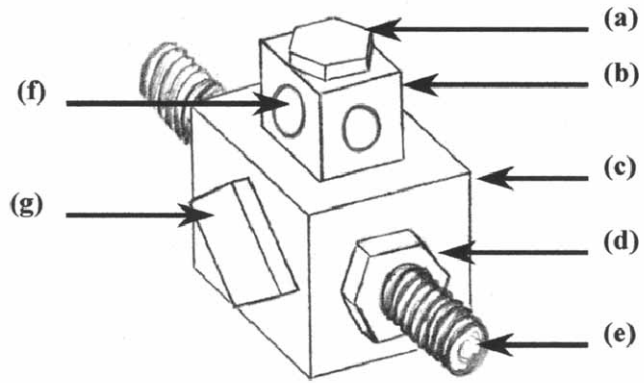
Diagrammatic representation of fixator clamp & its parts. (a) Bolt for holding Steinmann/Denham pin; (b) Swivel block; (c) Sliding block; (d) Nut on threaded rod; (e) Threaded rod; (f) Tunnel for Denham/Steinmann pin; (g) Locking bolt.
